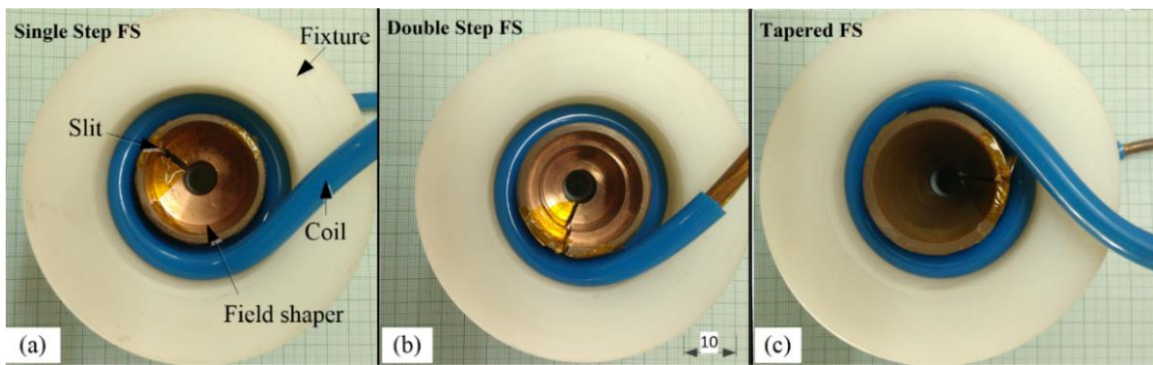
Assembly of different types of FS (a) Single-step , (b) Double step and (c) Tapered FS
